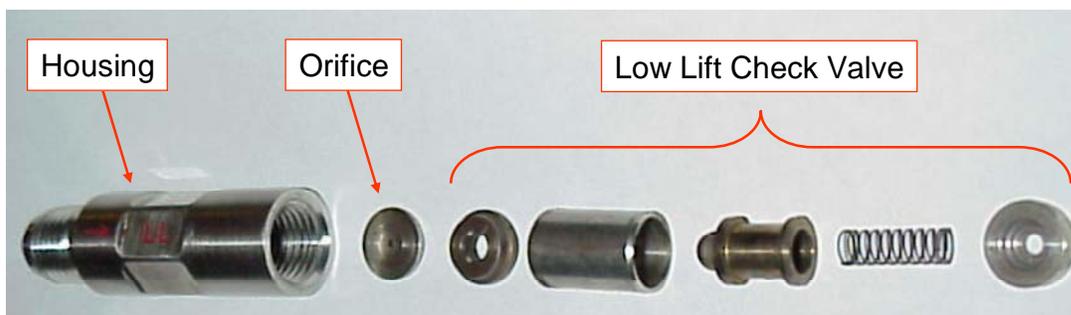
The low-lift check valve for Eco-Jet will be used in further testing. It is expected to be more effective than the simpler ball-and-spring style check valve.
